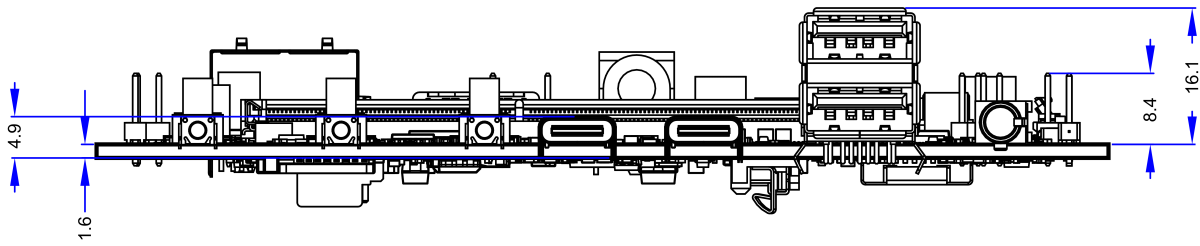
Dahlia Carrier Board dimensions (in millimeters) – back side (back view)
